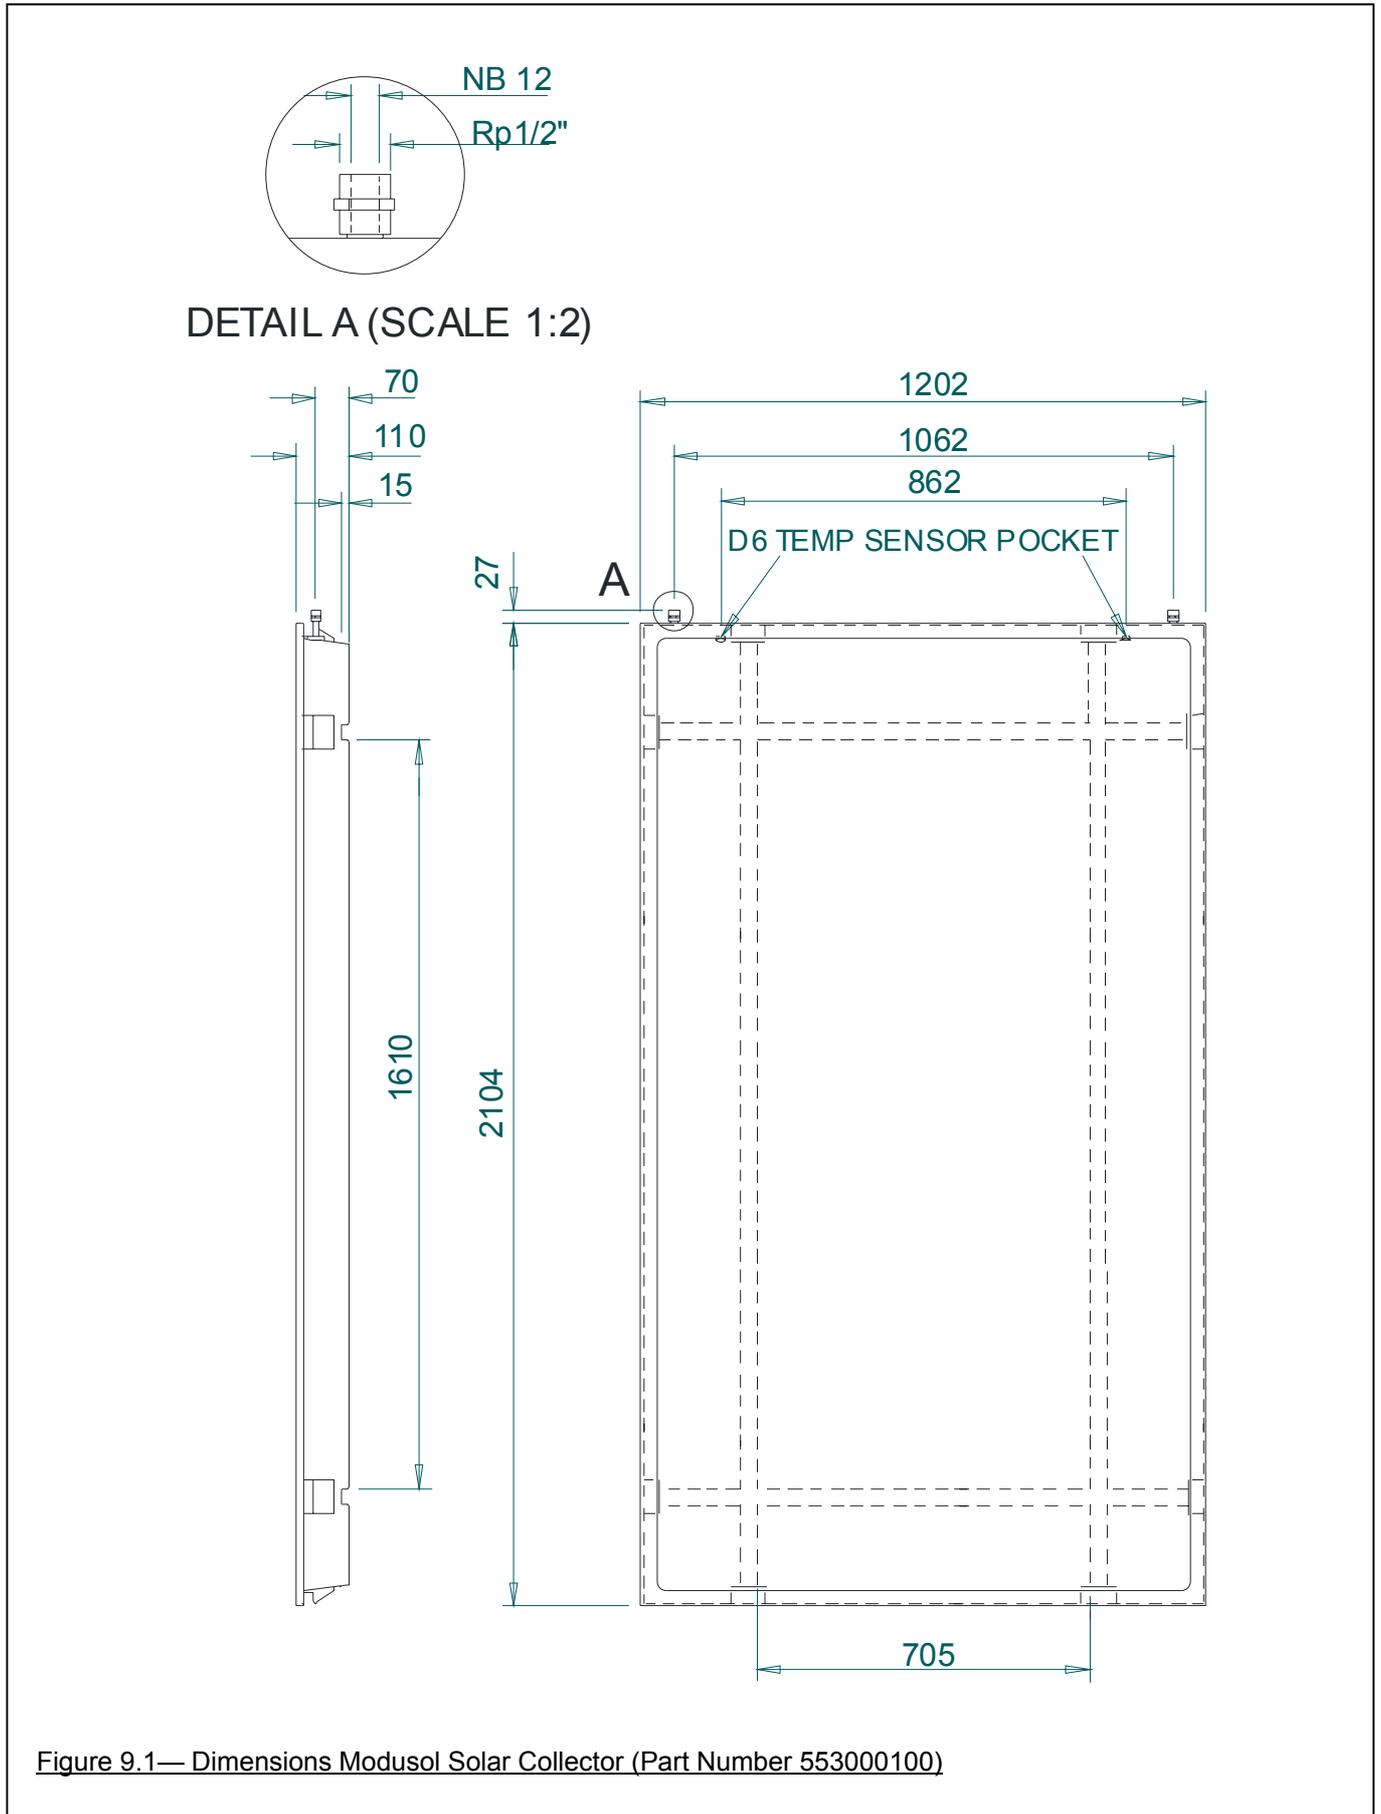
Dimensions Modusol Solar Collector (Part Number 553000100)
